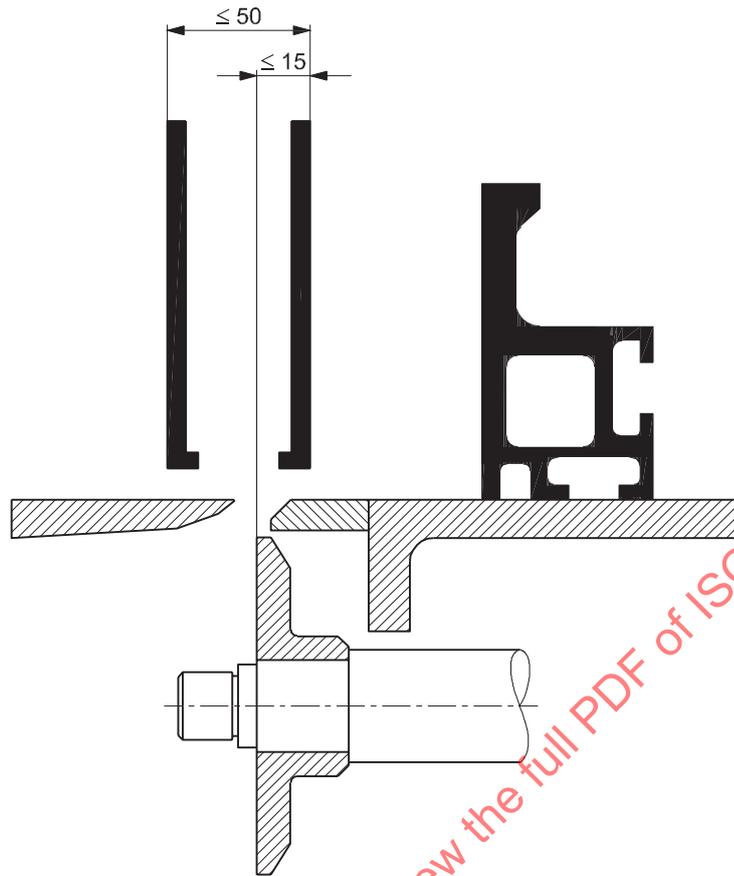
Maximum width of saw blade guard on machines with saw blade guard mounted separately from riving knife and with non-tilting saw blade
